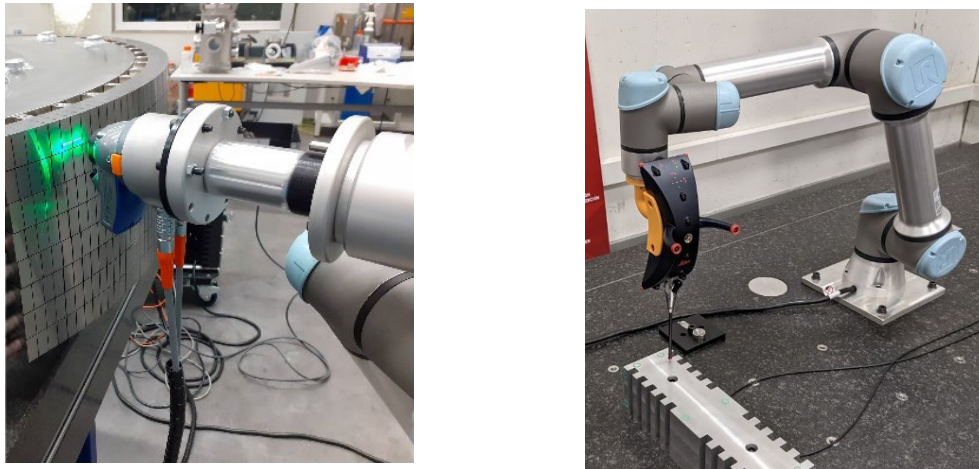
Ad-hoc measurement tool for IVT tiles (left) and CB datums (right)
